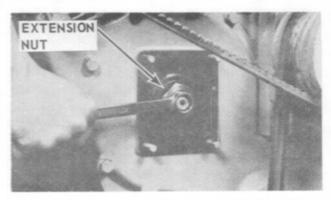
Accessory drive shaft and housing; disassembly and reassembly.
